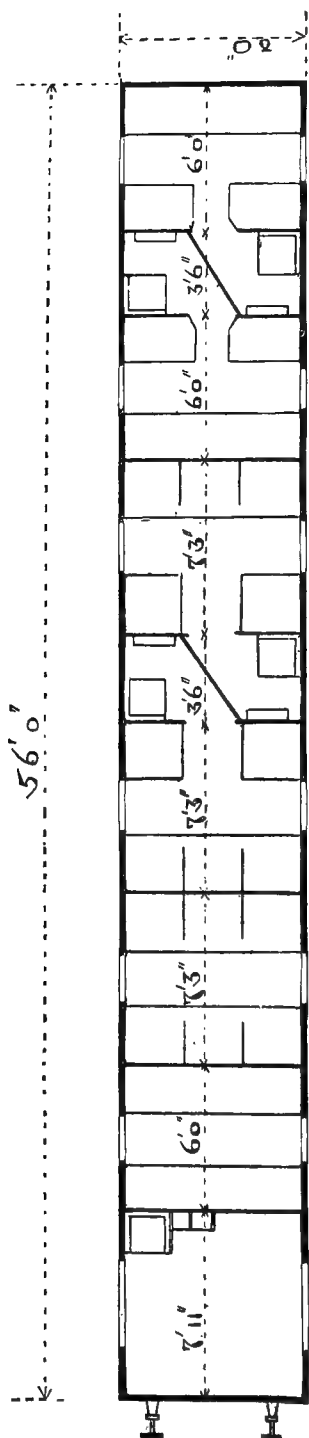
Plan of compartment carriage, Midland Railway, England.
